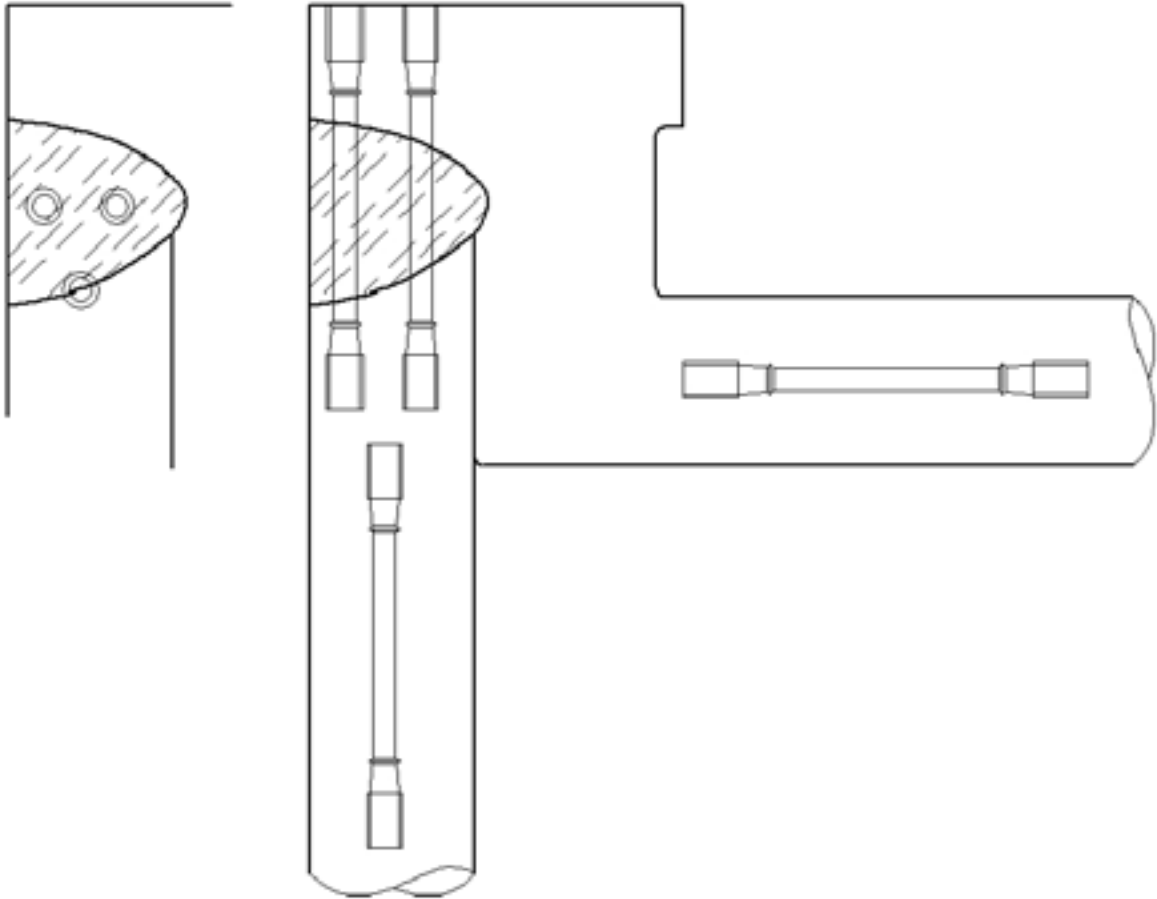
Specimen extraction positions in cross-weld, weld metal and heat affected zone positions. Parent metal specimens were cut both from the shell and the lid as indicated.
